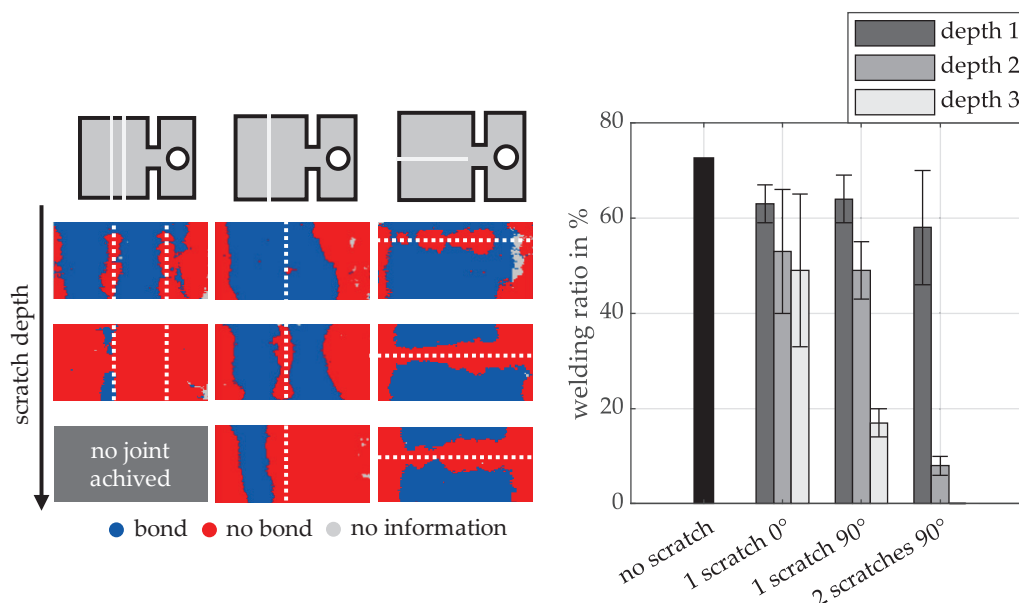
(left) Ultrasonic examination of the scratched and welded specimens (welding direction: from right to left). (right) Welding ratios of the analysed specimens.
